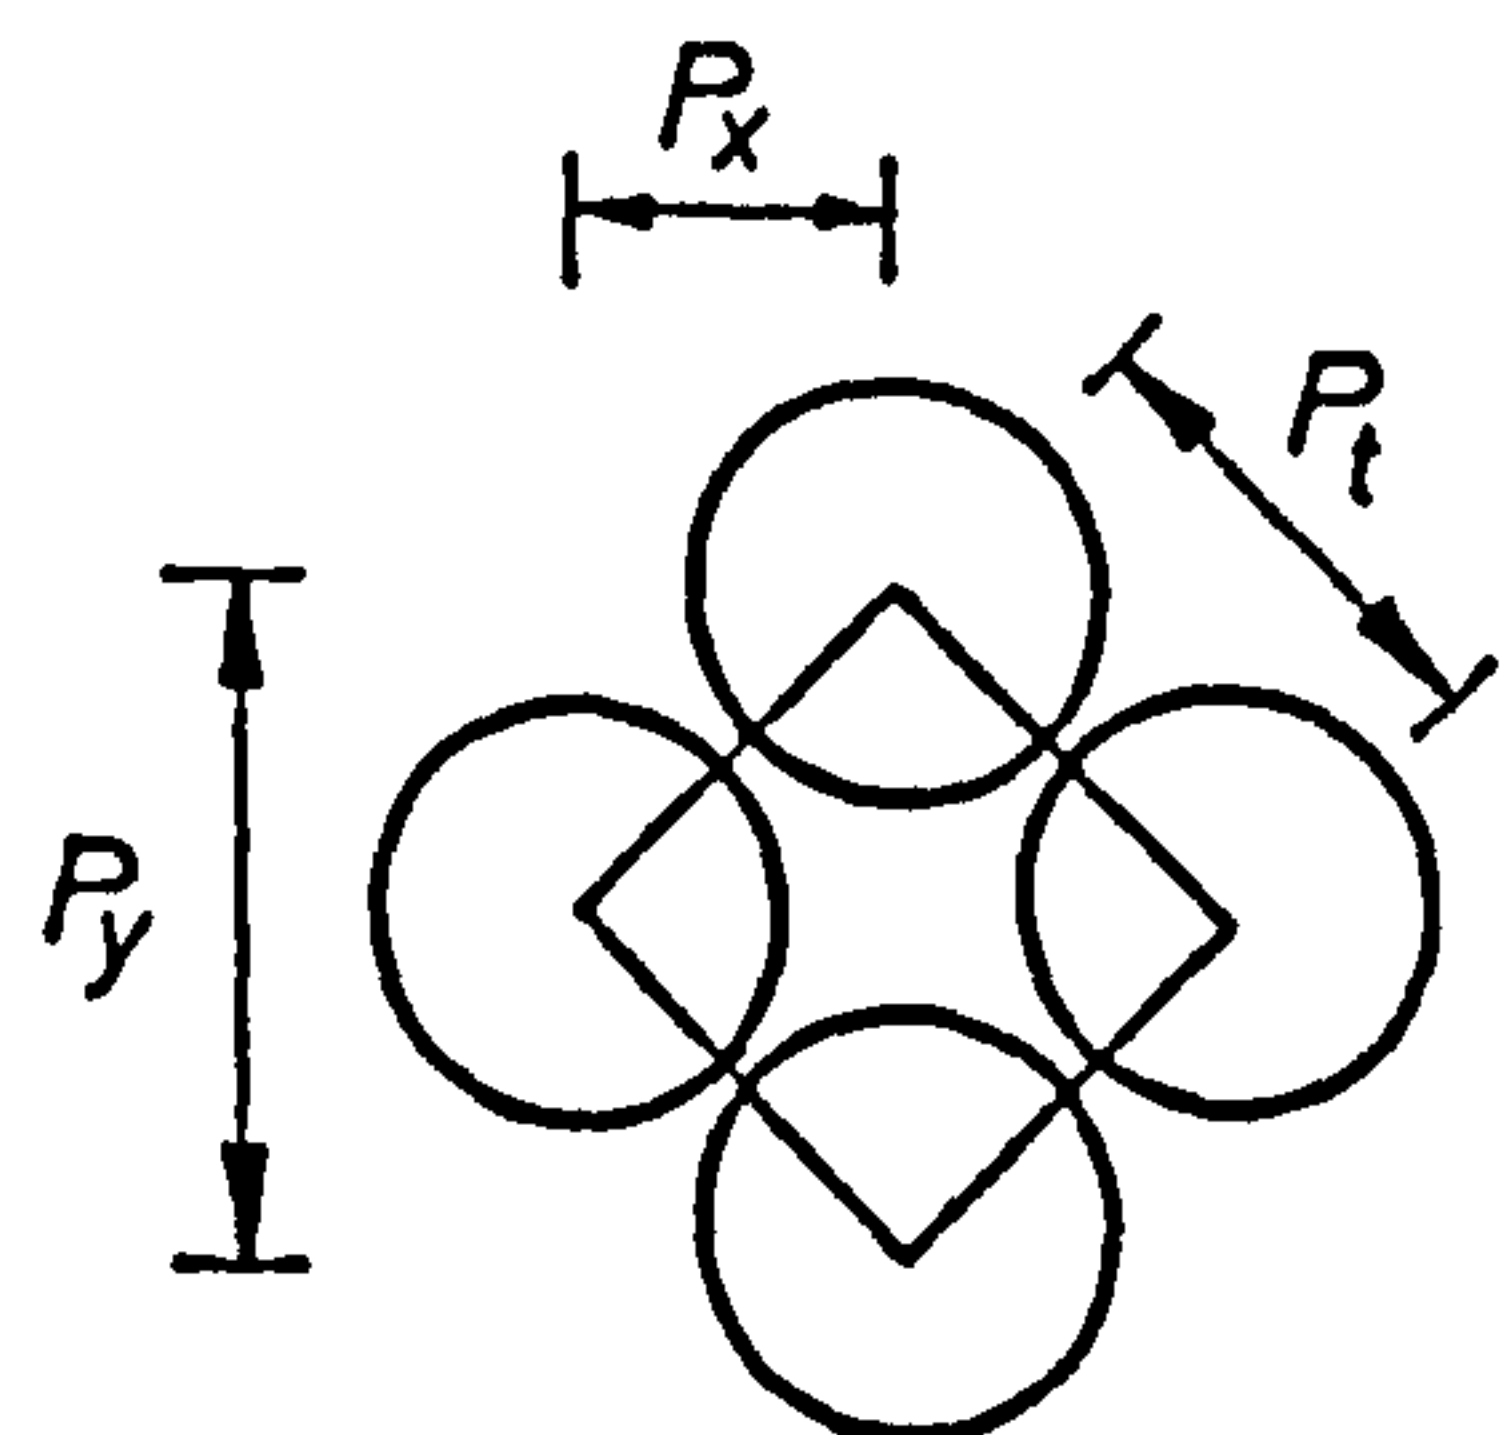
Tube array layouts, showing definition of tube pitches.
